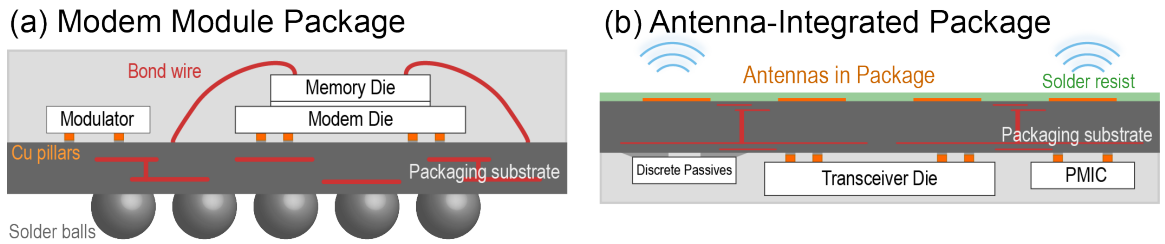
Examples of system-integrated mm-wave packages (a) modem SoP (b) antenna-integrated package.
